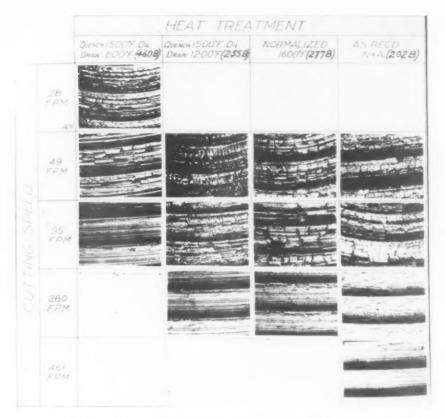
Surface finishes on SAE 3140 steel machined dry at various speeds at 0.0035 in. Feed, 0.0625 ipr.
